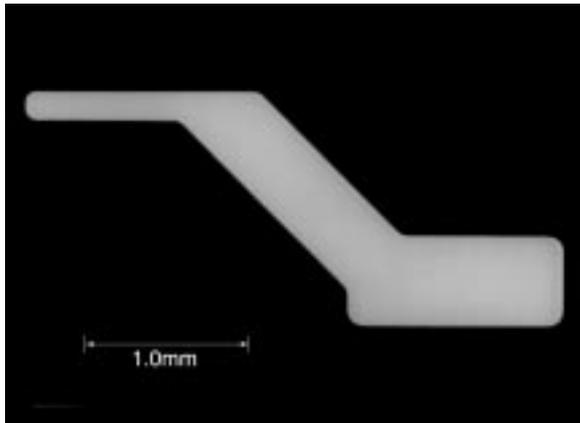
An example of ultraprecise die machining by the FSII EDM power supply.
